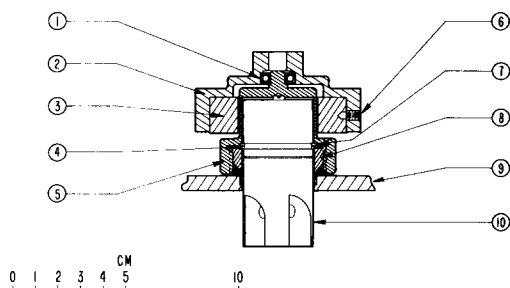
Scale drawing of magnetic drive. 1—Bearing (Norma-Hoffman # R4PP); 2—aluminum holder for magnet; 3—ceramic magnet; 4—O-ring seal (Parker # 2-28, ethylene-propylene); 5—barrier, threaded to welded collar (Hastelloy B); 6—set screw; 7—retaining ring; 8—collar, welded to reactor body (Hastelloy B); 9—reactor body (Hastelloy B); 10—rotor (Teflon).
